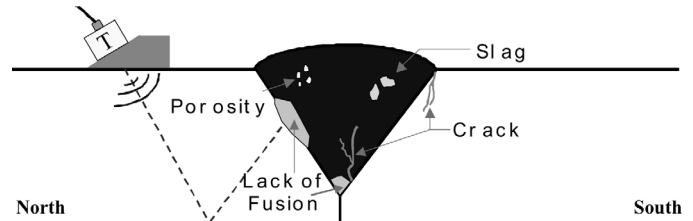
Ultrasonic weld inspection for identification of cracks, porosity, slag, and LOF.
